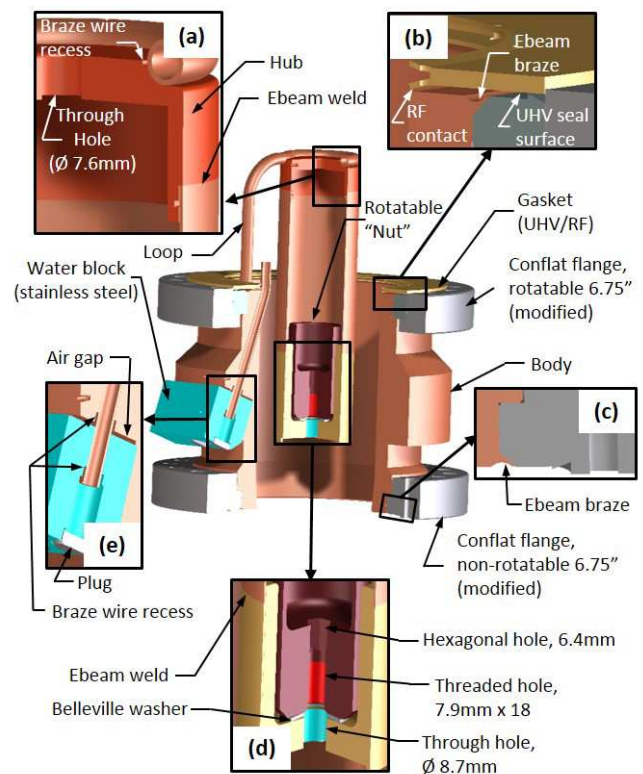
Coupler assembly with a quarter section cut-out to show the internal structure.
